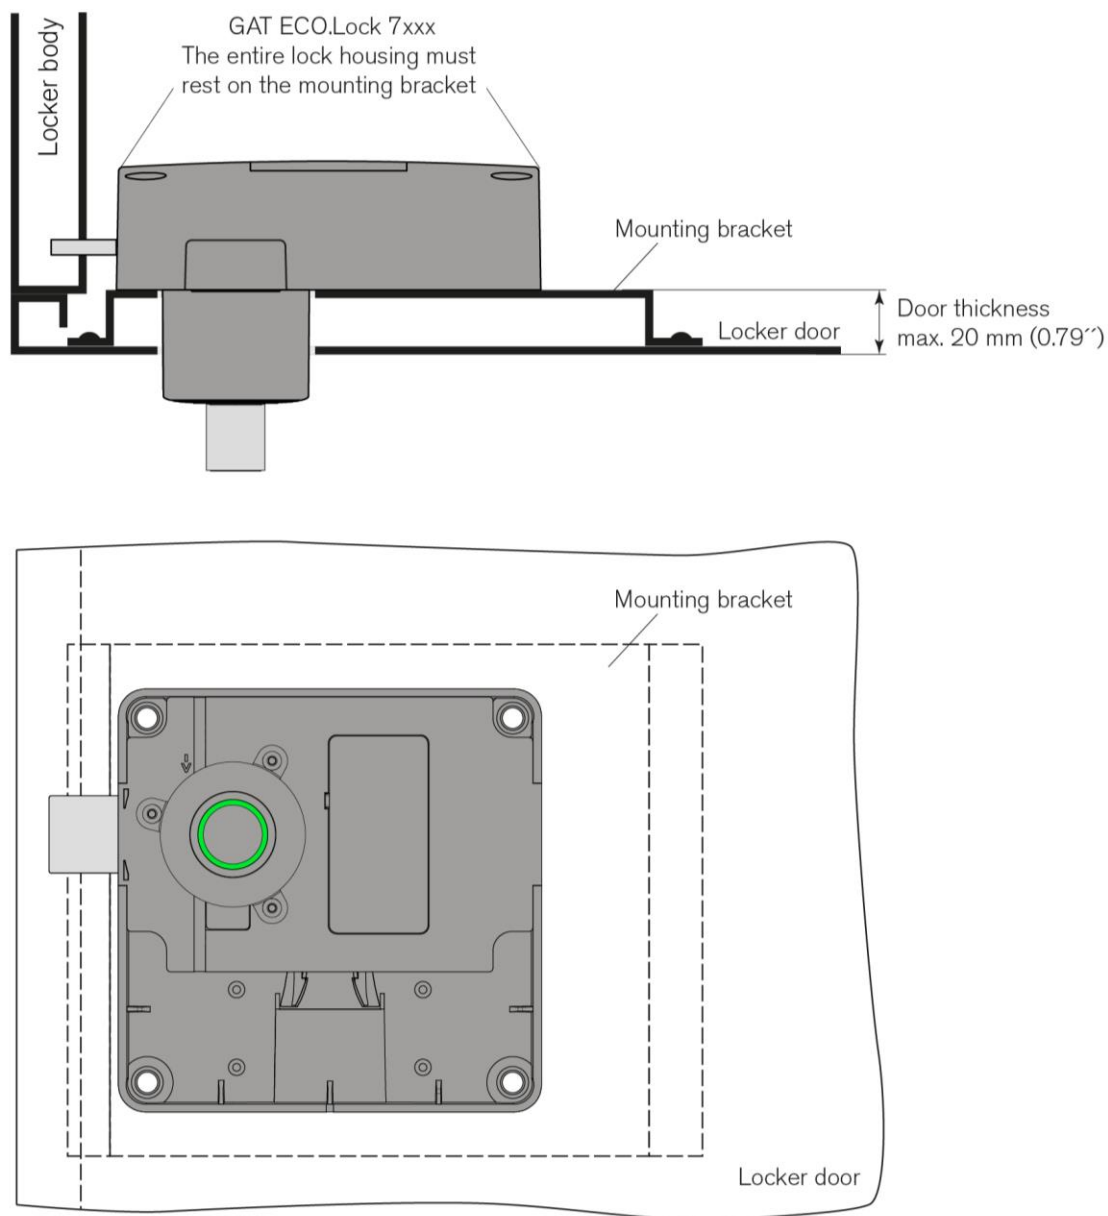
Installation of the GAT ECO.Lock on a single-wall metallic door
